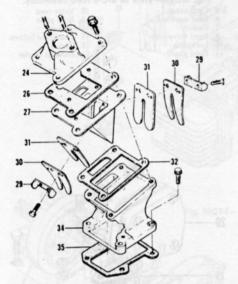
Reed inlet valve installation used on Model MC-30. Two sets of reed valves are used to increase intake capacity. Installations on dual carburetor MC-40 and MC-70 models are similar. Refer to Fig. MC22.
